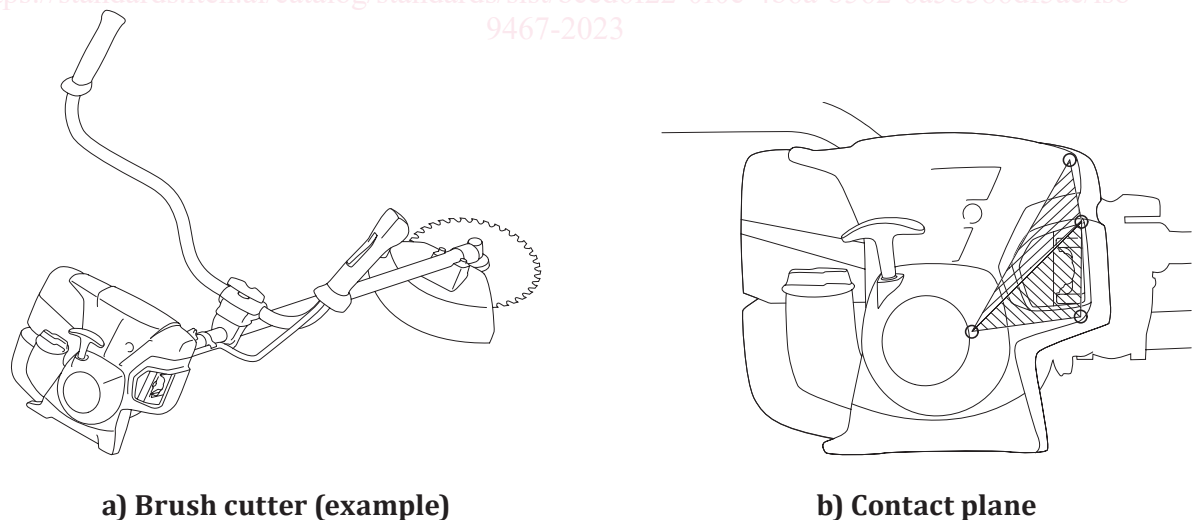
Brush cutter, grass trimmer, pole pruner, edger and similar shaft-drive machines — Contact plane determination
